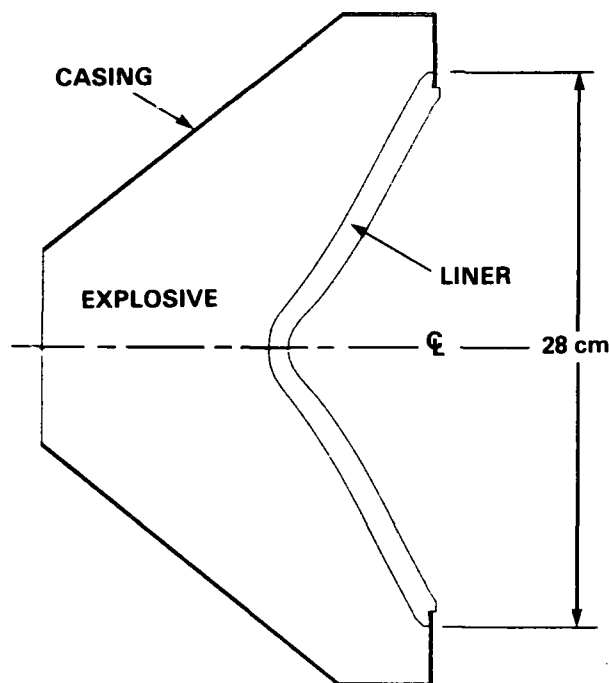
Cross-section of CIL "power cone" EFP showing liner profile and explosive loading.
